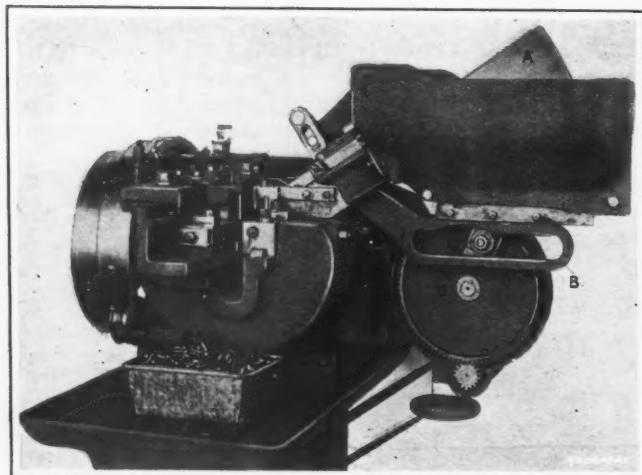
Side View of Automatic Feeding Mechanism applied to Thread-rolling Machine
